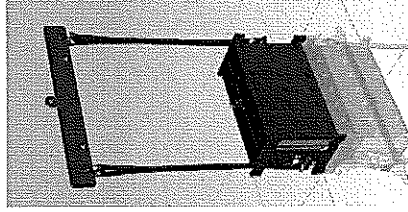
RENDER OF THE POST MOLD BEING LIFTED USING THE SIDE LIFTING LOCATIONS, FOR USE WHEN ASSEMBLING AND DISASSEMBLING THE MOLD.
